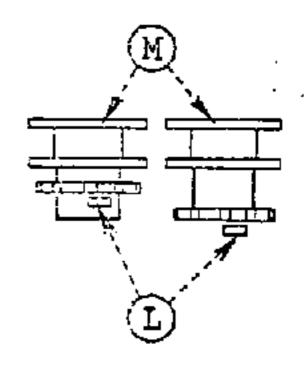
Check Transfer Teeth L on the Actuators, Adjust so they are close to Transfer Gears M.
